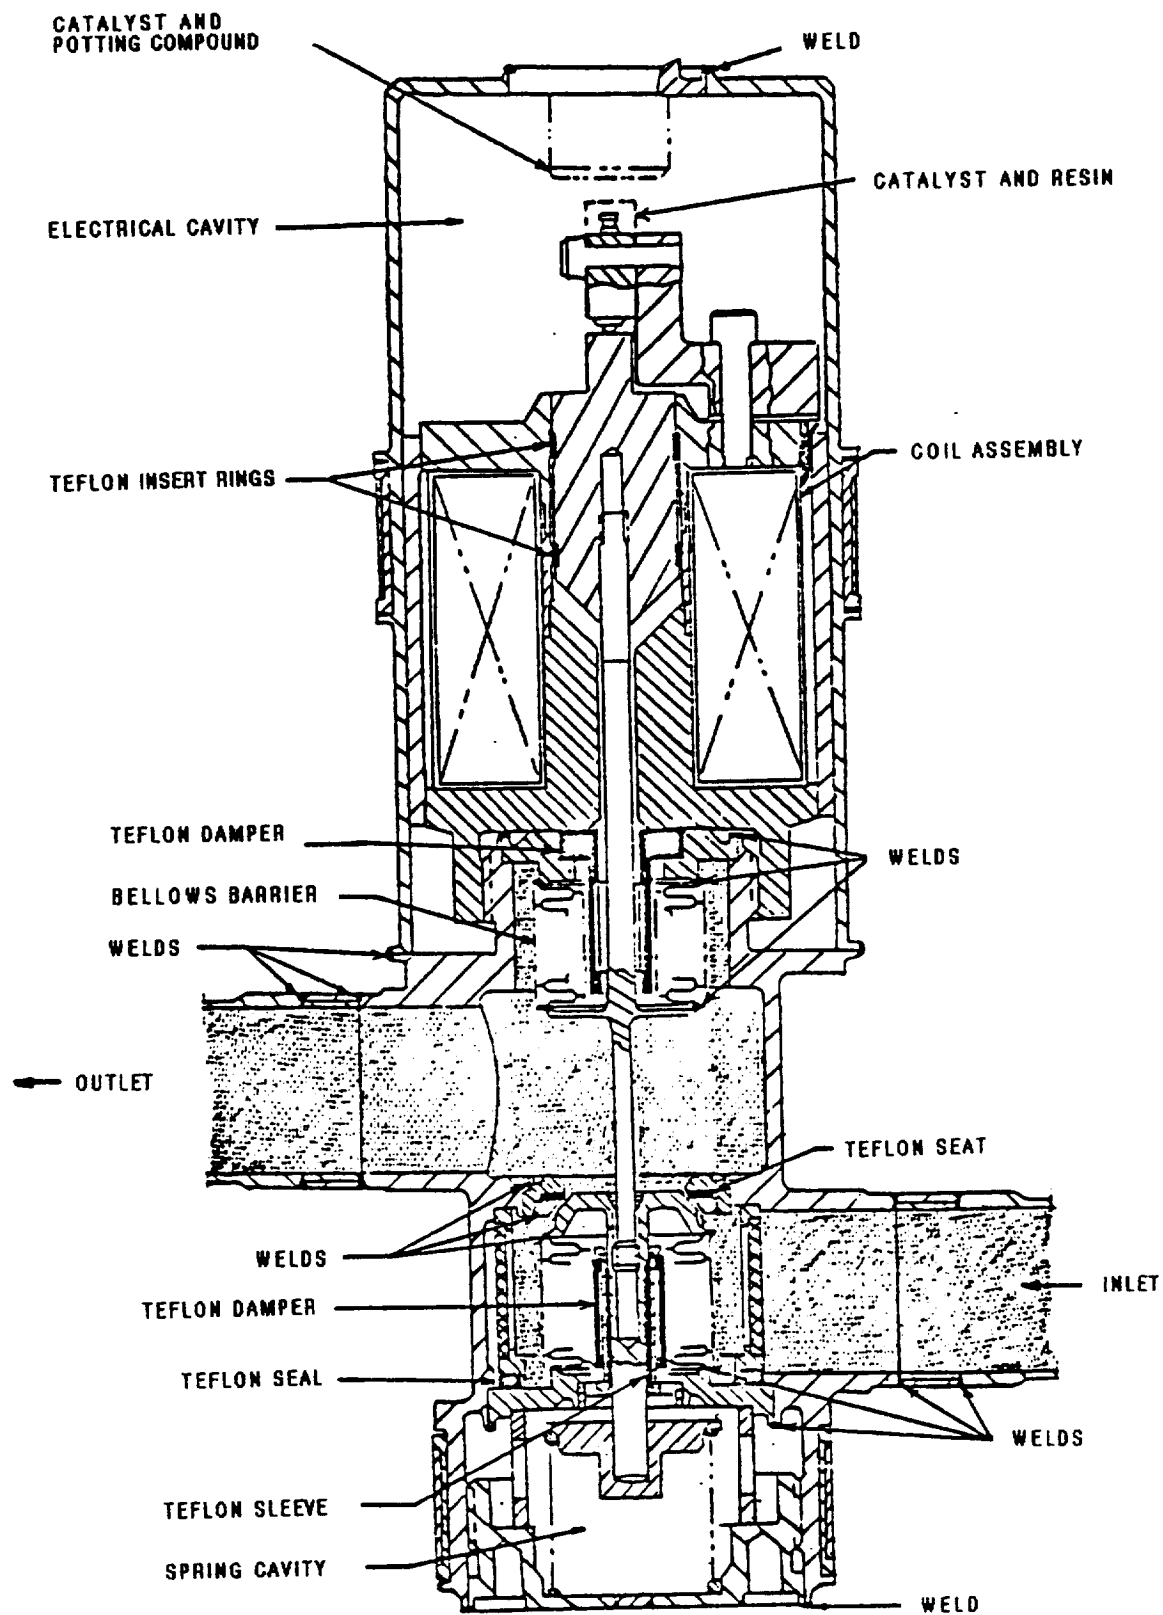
HELIUM PRESSURE REGULATOR ASSEMBLY
